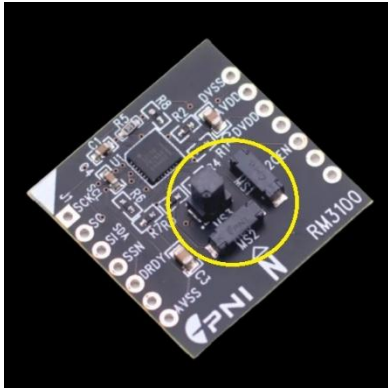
Location of the three magnetic coil assemblies on the RM3100 breakout board. Be sure to avoid damaging the coils during magnetometer assembly.
